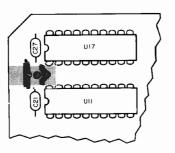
Interface PC Board Assembly (0000-5110-800-J2)
